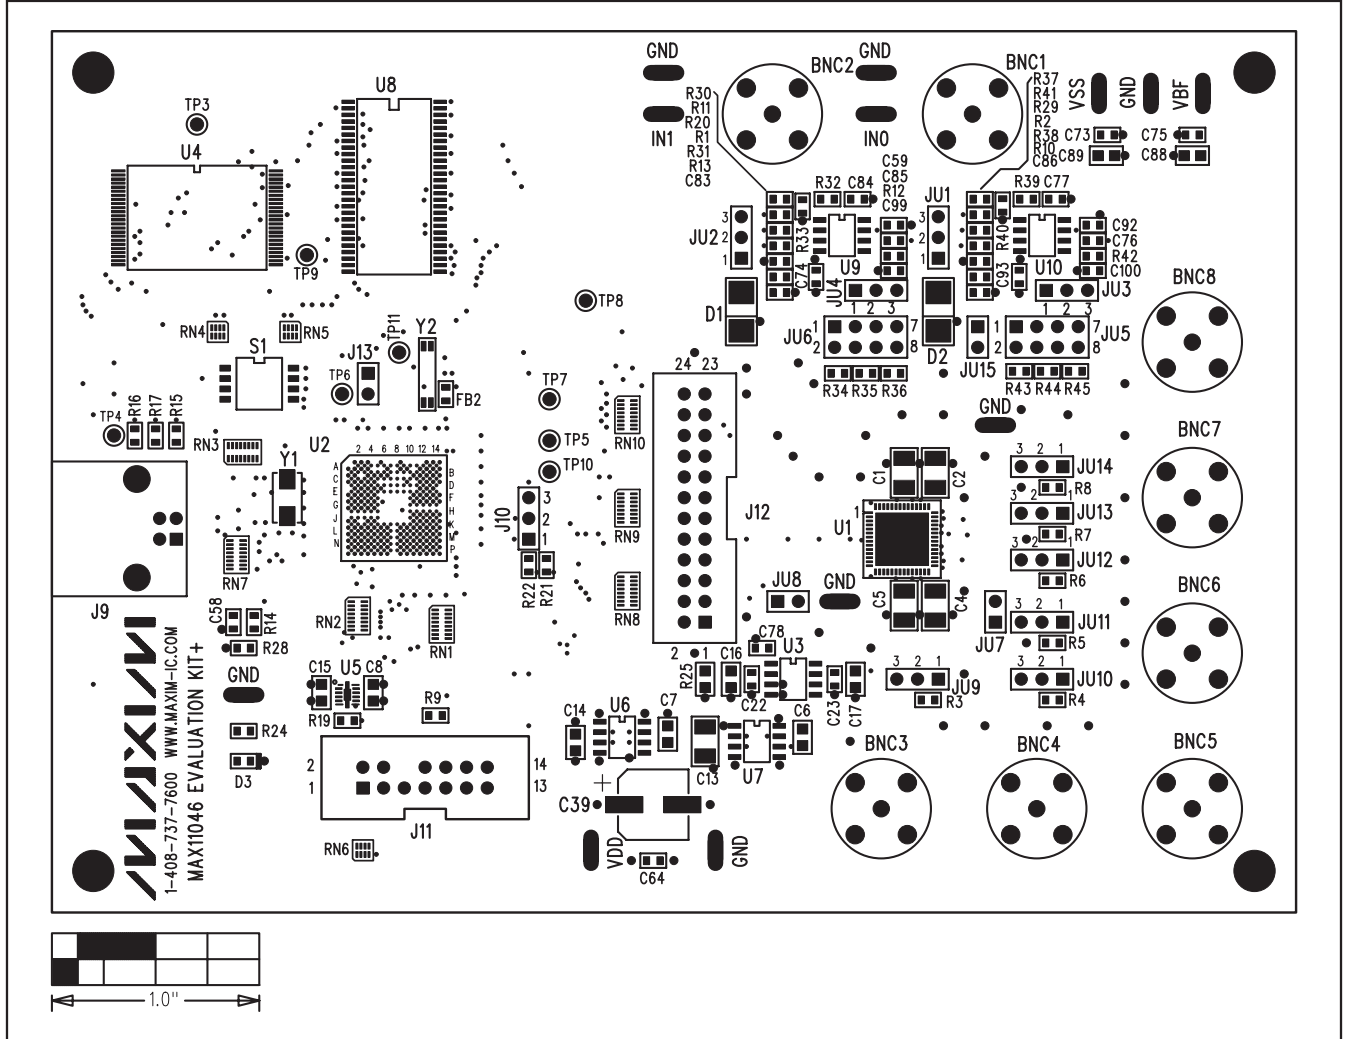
MAX11046 EV Kit Component Placement—Component Side
